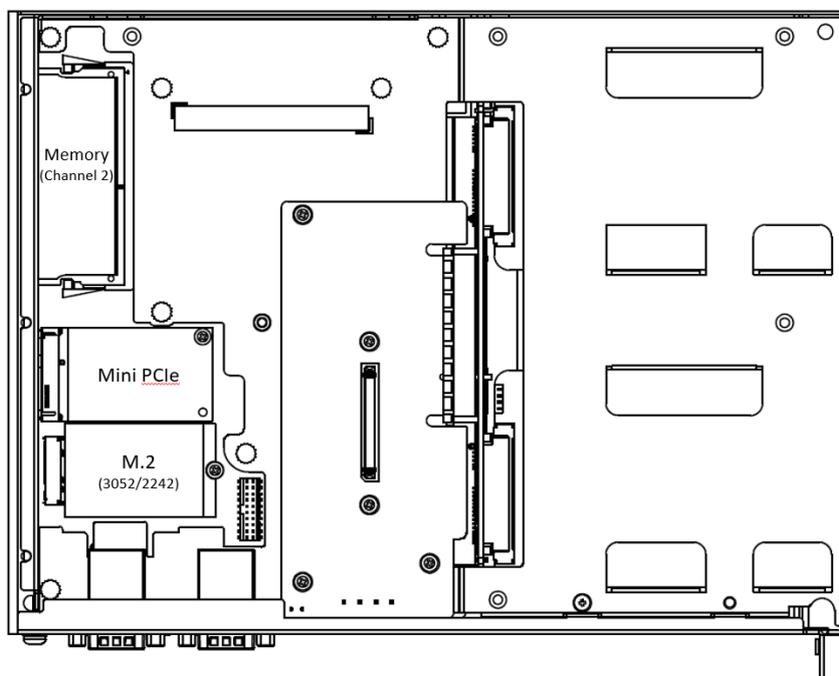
Top View - Memory (Channel 2)/mPCIe/M.2 (3052/2242)
